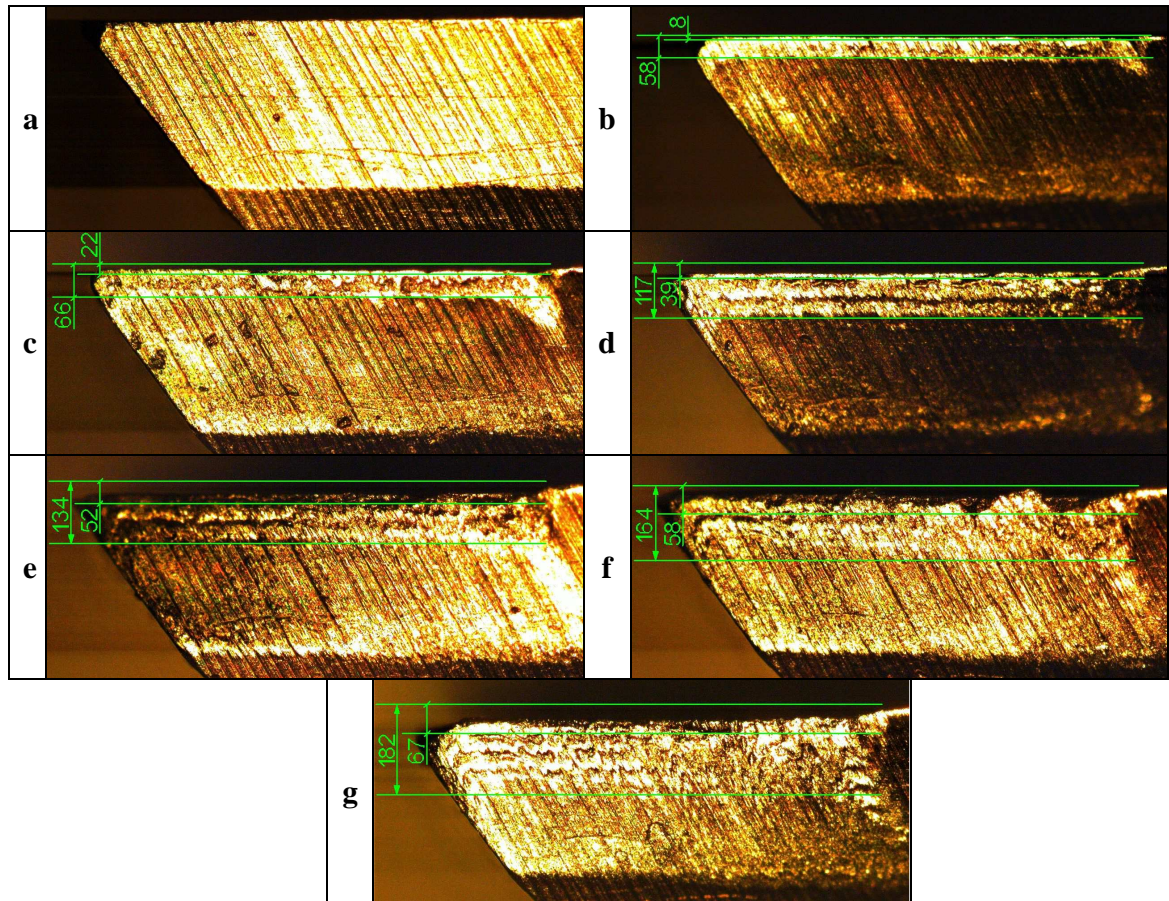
MTE 9mm end mill tooth # 2 linear toolpath clearance face wear a) Fresh tool, b-g) After pass 1-6 (each 162 mm length, 9 mm width, 1 mm depth).
